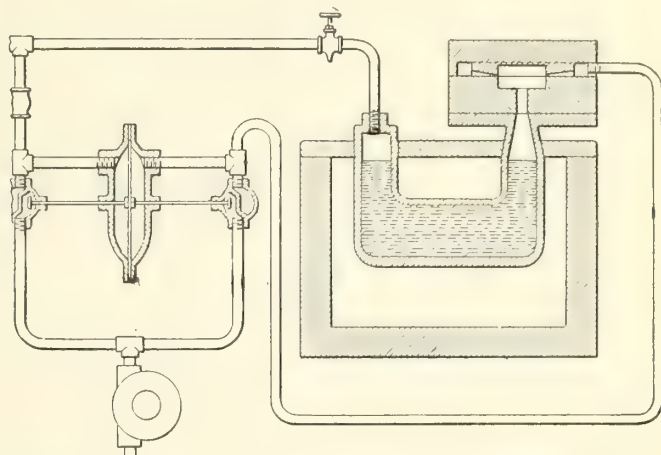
DIE-CASTING MACHINE WITH VACUUM APPLIED DIRECTLY TO DIE.
